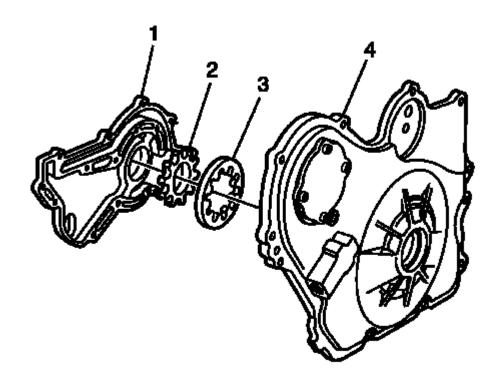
Oil Pump Assembly Courtesy of GENERAL MOTORS COMPANY
